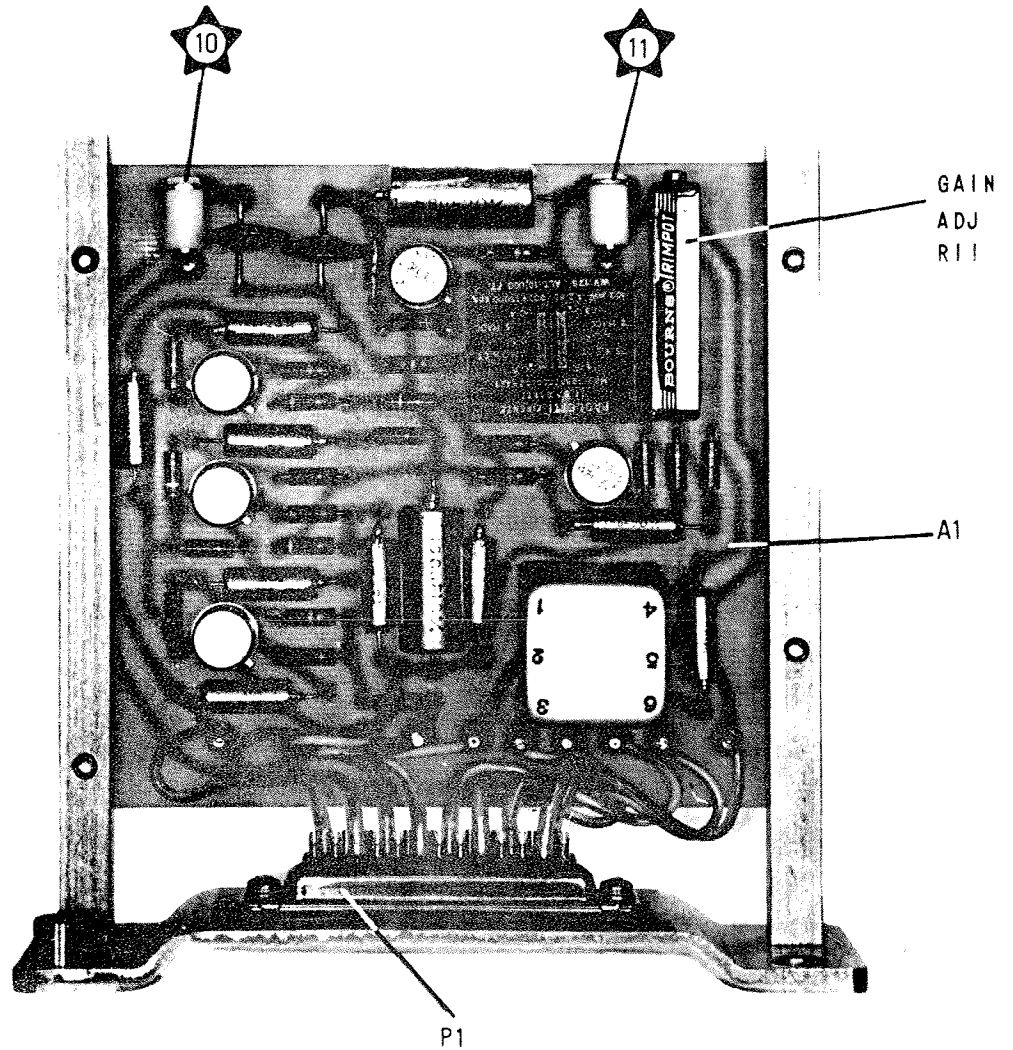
LSB Balanced Modulator (Foil Side Up), Component and Test Point Location
